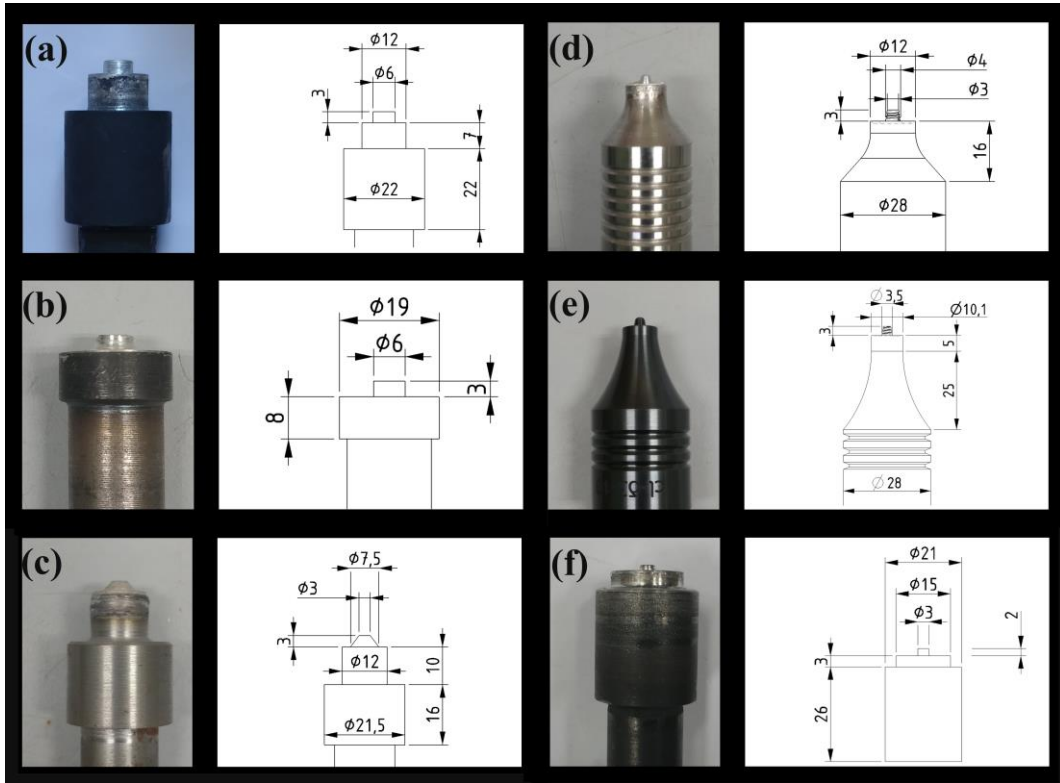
FSW tools tested. (a) cylindrical pin tool with moderate shoulder (12mm). (b) cylindrical pin tool with large shoulder (19mm). (c) conical (tapered) pin tool conducive to better material flow. (d-e) tapered threaded pin tool with circular grooved shoulder the pin shape is considered best for material flow tool (d) and tool (e) have the same shape but with different dimensions. (f) cylindrical tool with a broad shoulder and a small pin used to reduce the generation of internal defects.
